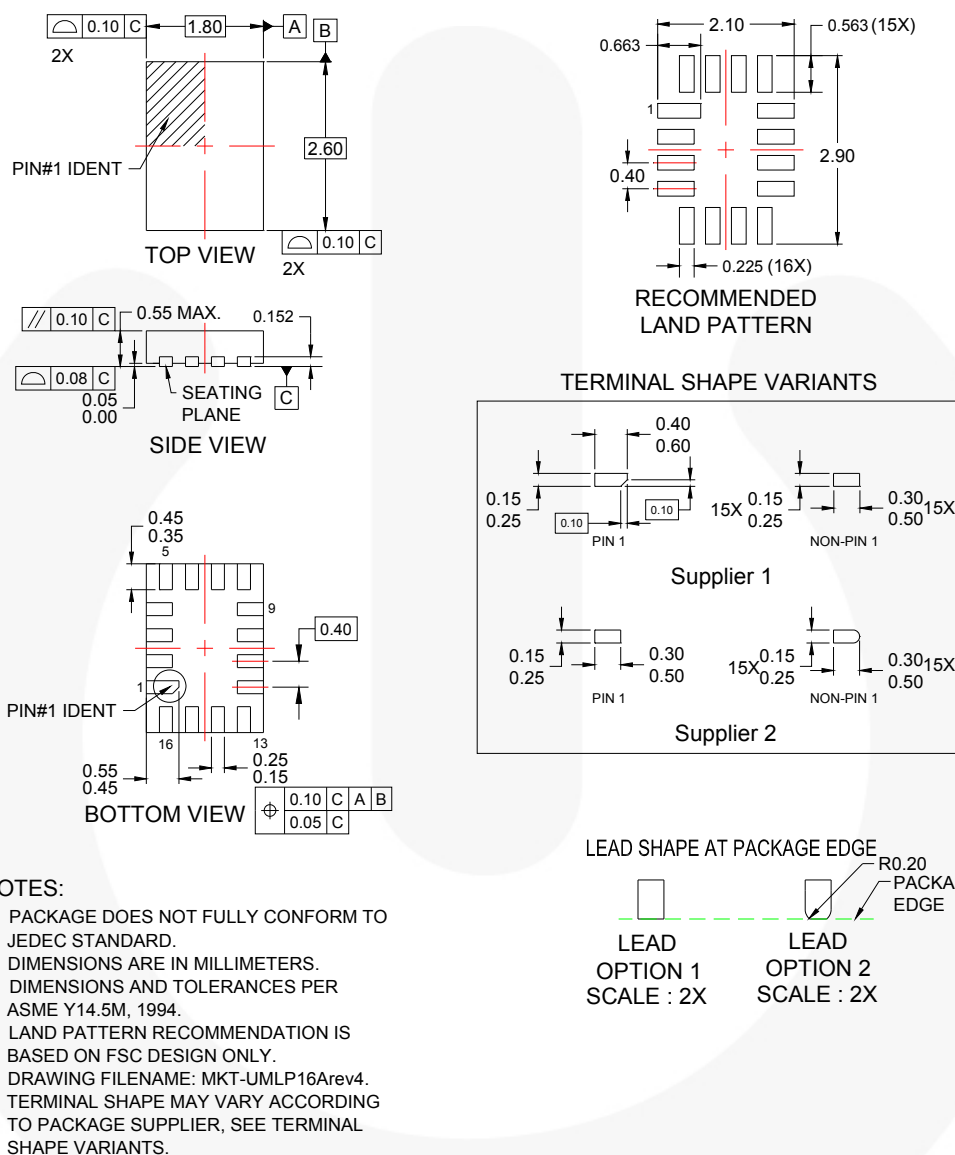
16-Pin Ultrathin Molded Leadless Package (UMLP)
